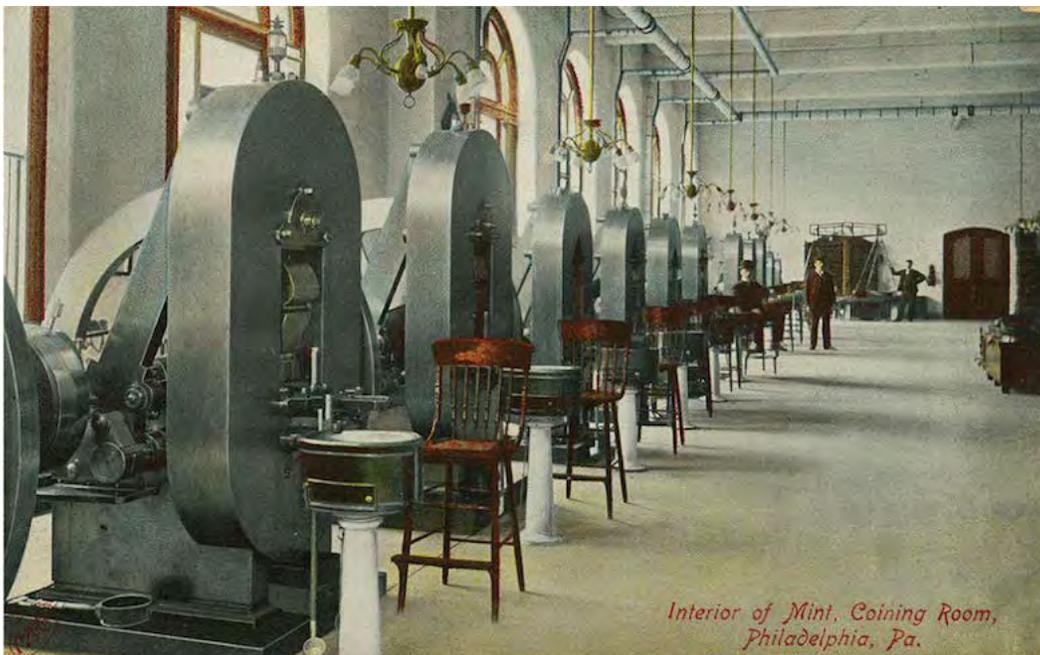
Manufacturing floor equipment, "interior of Mint, Coining Room." David Sklow collection.
